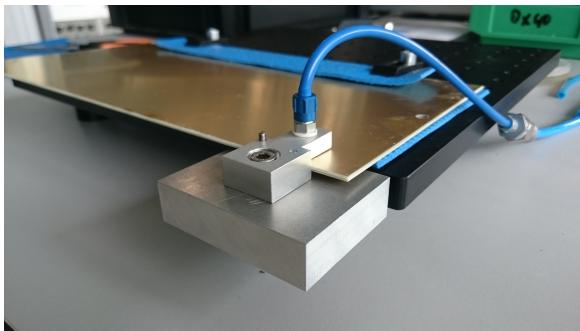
The clamping device is used to measure the restrictions in the PCB surface.
